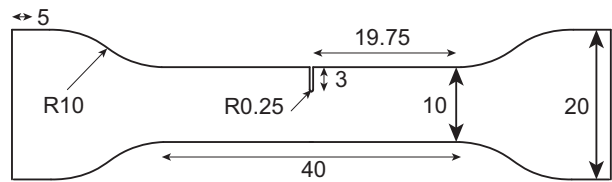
A.1 – Top view of the Single Edge-Notched Beam (SENB), showing the dimensions in millimeters. The sample thickness was 2.5 mm.
